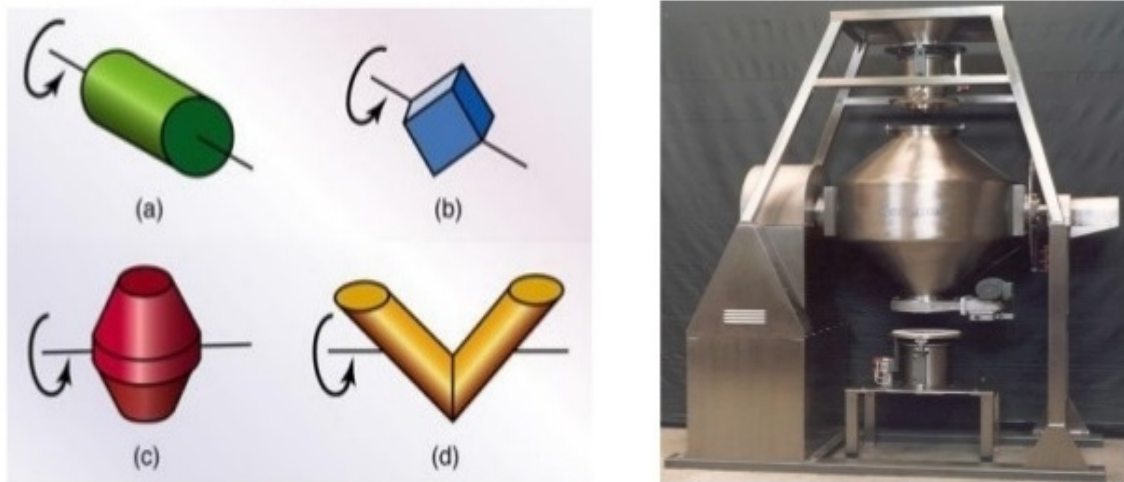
Some common equipment geometries used for blending powders (a) cylindrical (b) rotating cube (c) double cone (d) twin shell
